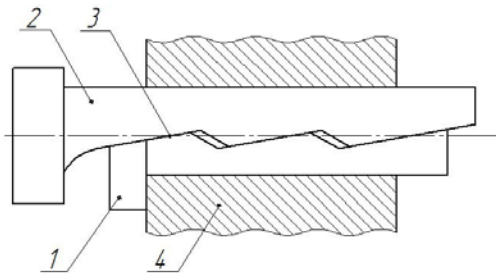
Tool for hardening processing inner cylindrical surfaces by SU 854696.
